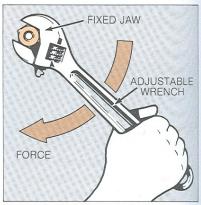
When using an adjustable wrench, be sure it is tightly adjusted to the nut. Pull the wrench so that the force is on the side of the fixed jaw.
